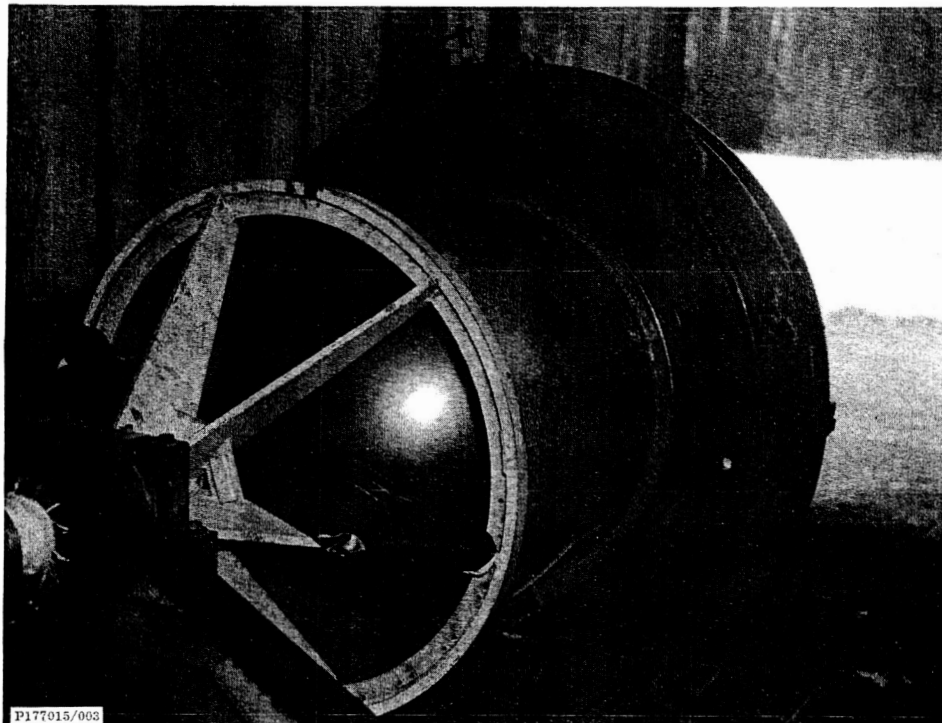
HEAD END OF 1000-POUND MOTOR BEFORE TEST
